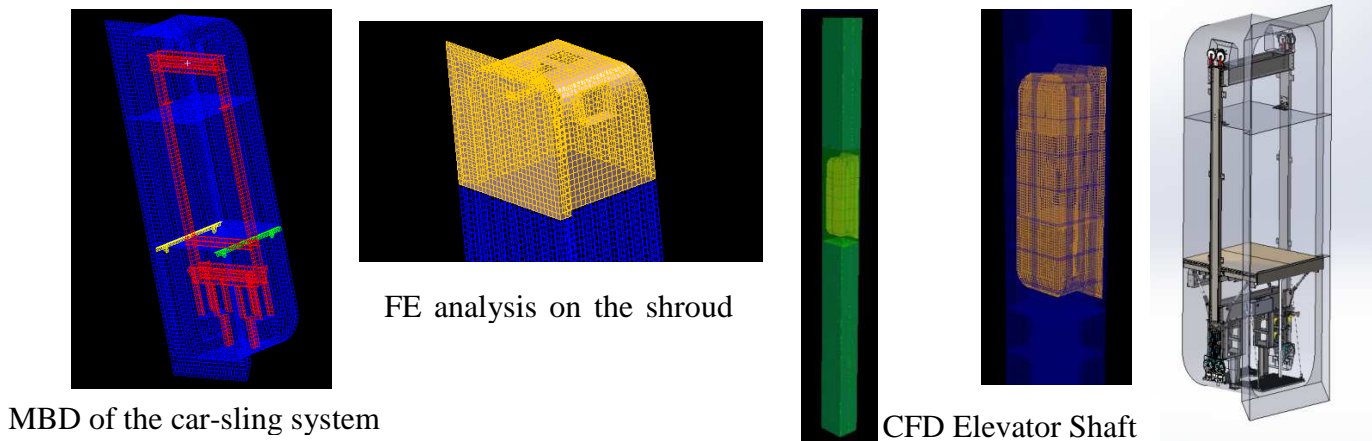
3D CAD assembly model of an elevator courtesy of Thyssenkrupp Elevator
